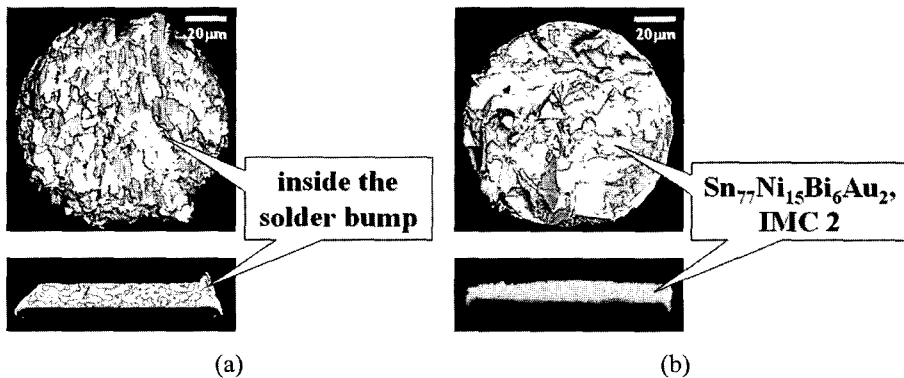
Top-view and cross-sectional images of the fracture surface after the bump shear test: (a) pre-reflow and (b) 1000 hr aging.
